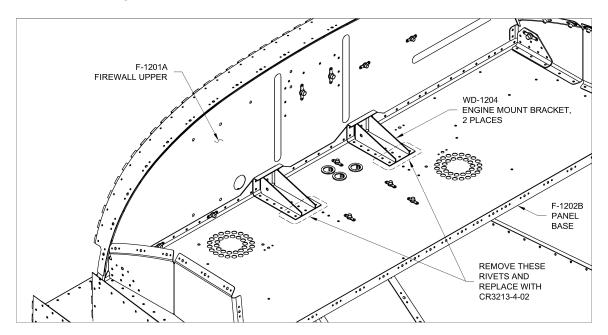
ENGINE MOUNT BRACKET RIVETS
